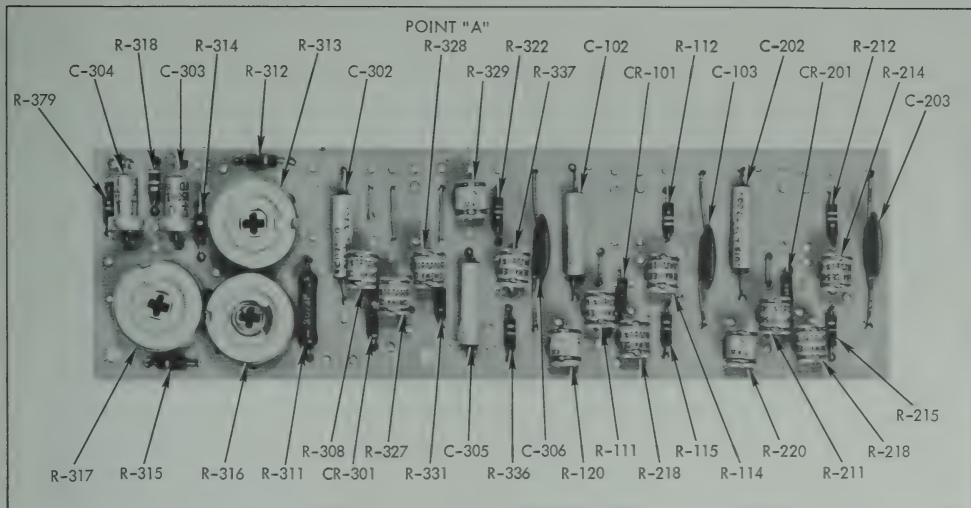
PRINTED CIRCUIT BOARD (CONTROL BOX)
